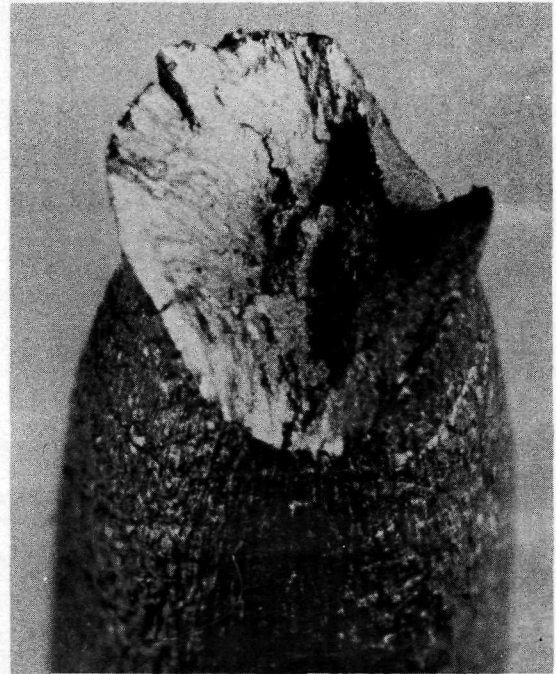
Fracture Appearance for Haynes-25 Smooth Bar
